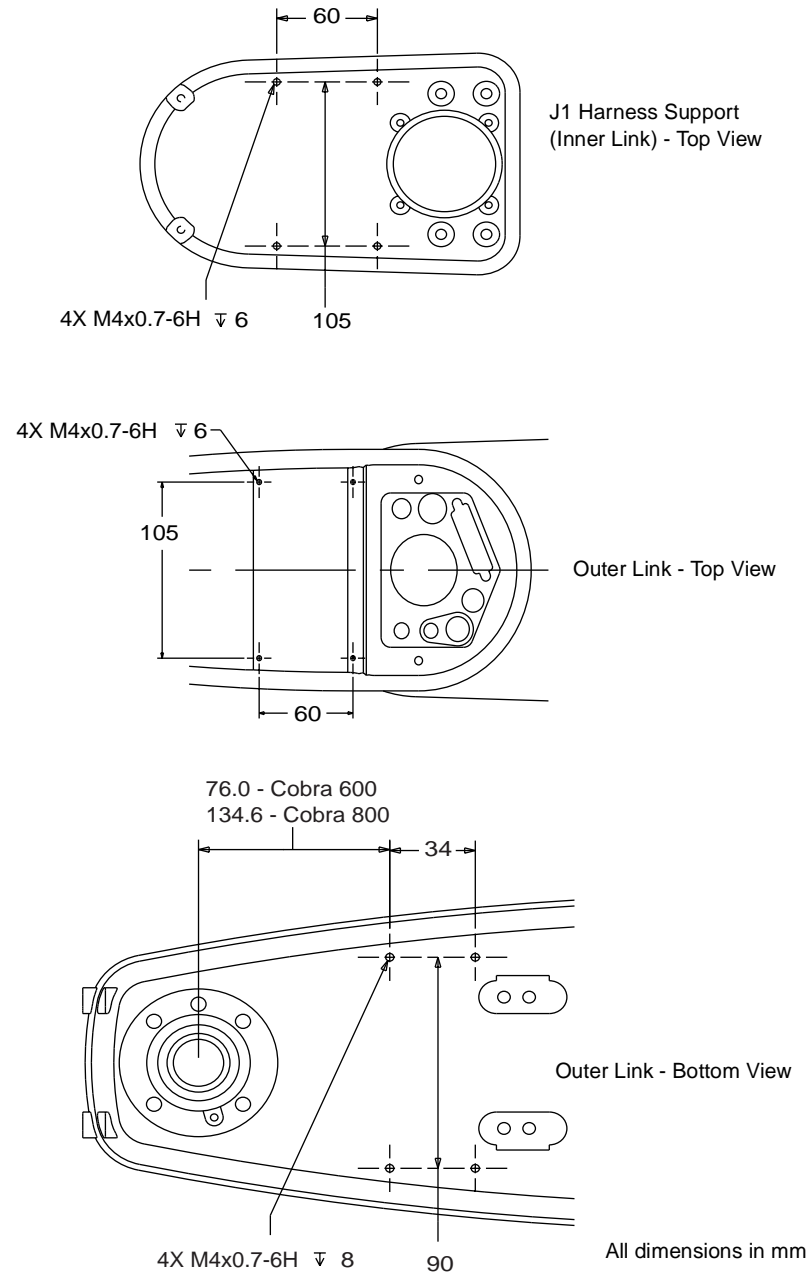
Locations for Mounting External Tooling on Robot Arm
